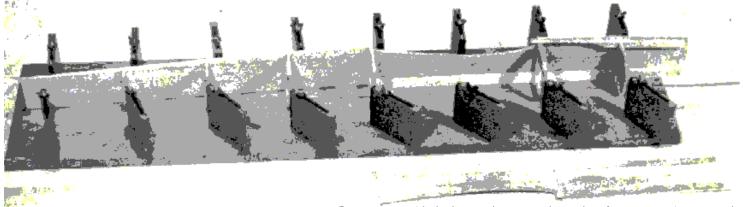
Jig blocks loosened on one side so that formers may be removed.
